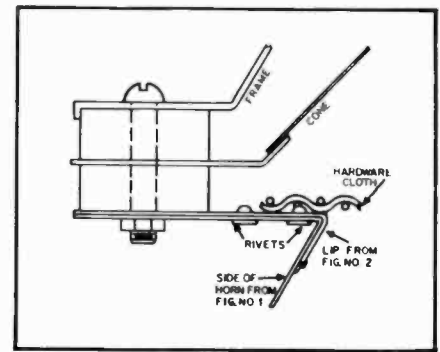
Detail of the mounting of the speaker on the flange and horn.
